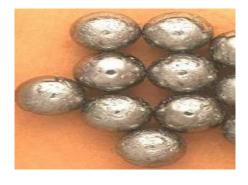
Ball bearing damages (Tuncer TOPRAK, 2023)
